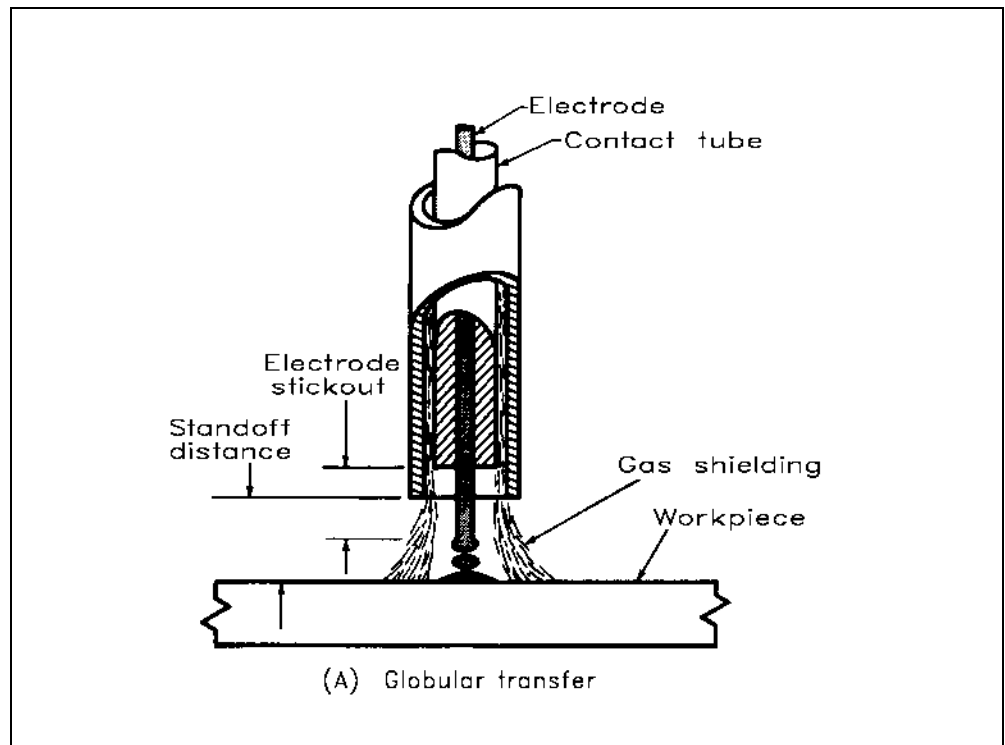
GMAW—Globular Transfer (Courtesy of the American Welding Society)
